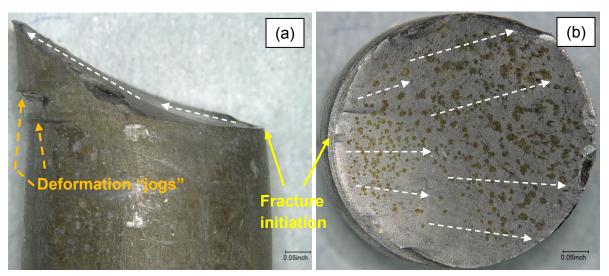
The fractured bolt from Figure 14 after removal and cleaning, showing the fracture surface from (a) the side and (b) the face. The white arrows indicate the fracture direction.
